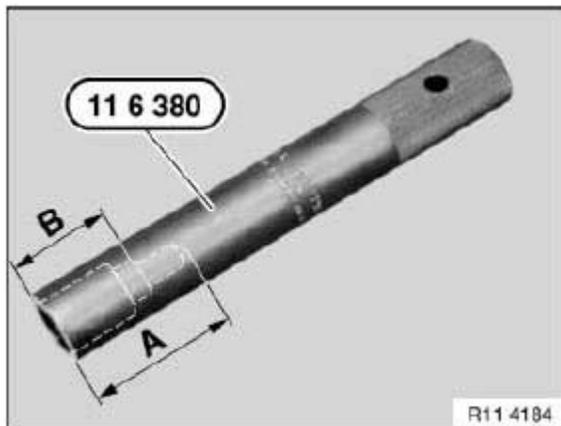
Identifying Special Tool (11 6 380) Dimensions
